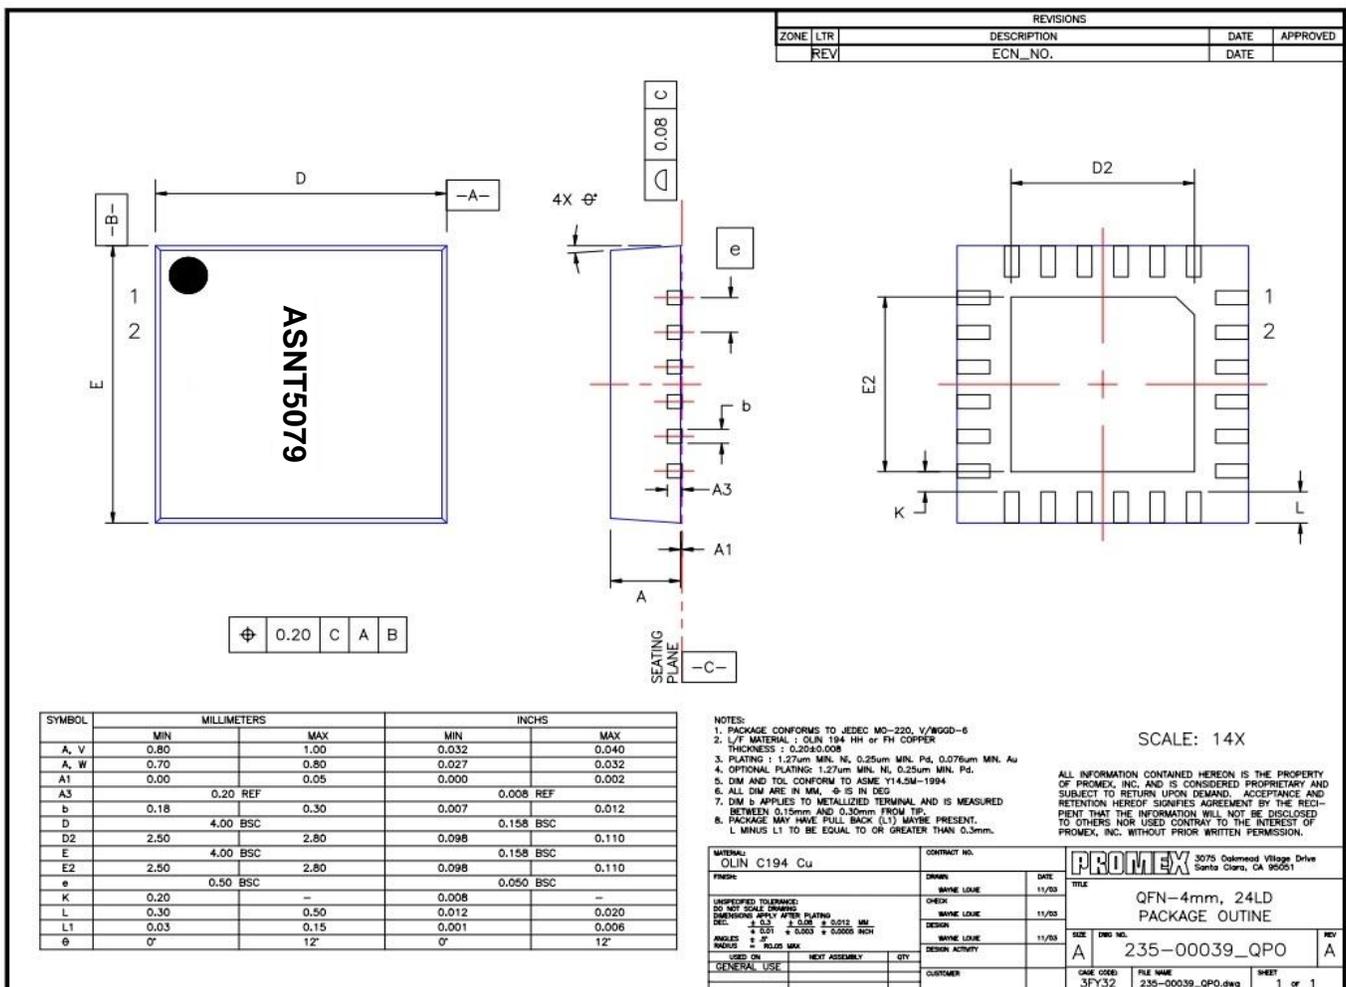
QFN 24-Pin Package Drawing (all dimensions in mm)
